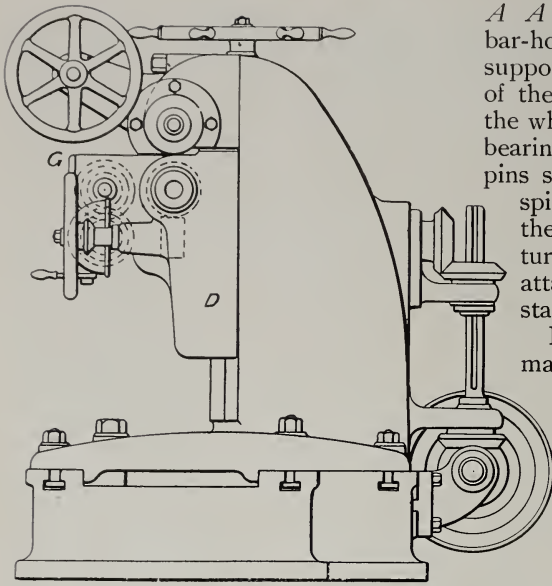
END VIEW OF THE LEFT-HAND HEADSTOCK OF THE MACHINE SHOWN IN FIG. 3
